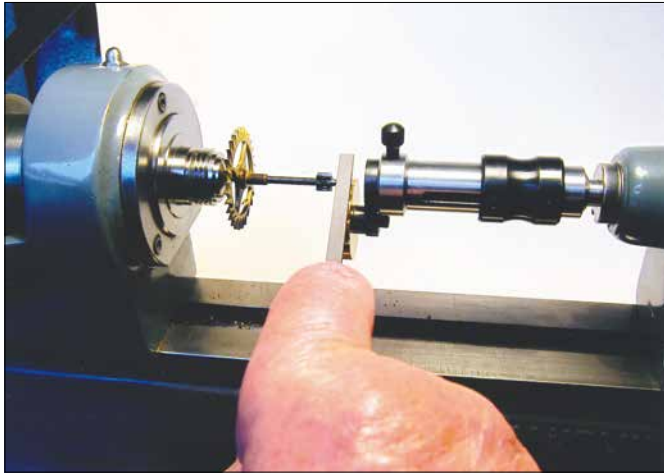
A and 4B show the set-up for re-finishing the pivot in the Schaublin 70 lathe. The Jacot tool is mounted in the tailstock. Figure 4C is the complete tool in a fitted case with drills and drill plate. With the pivoting tool shown, the drill plate not only supports the work, it also acts as a guide for the drill. This is in contrast to the standard drill plate supplied with the watchmaker's lathe, which is a deep cone which enables the end of the arbor to protrude, so that either the pivot can be supported for burnishing or allowing the end of the arbor to show through sufficiently for it to be centred and drilled.
